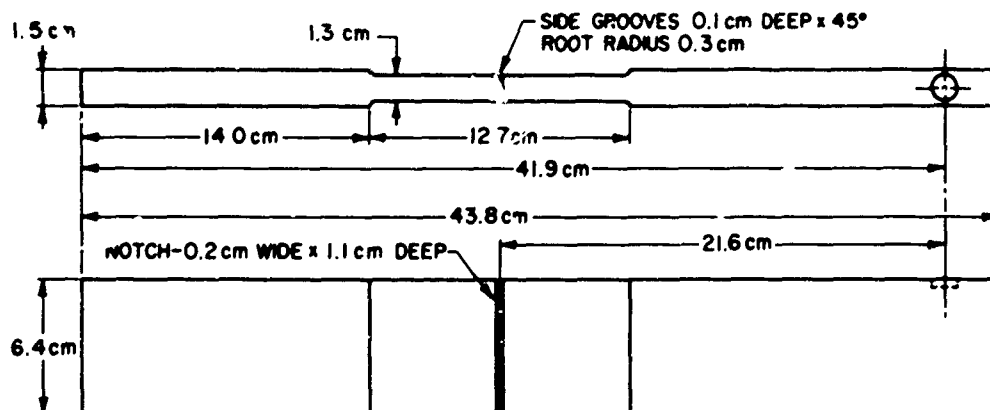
Design of single-edge-notch (SEN) cantilever fatigue test specimen
